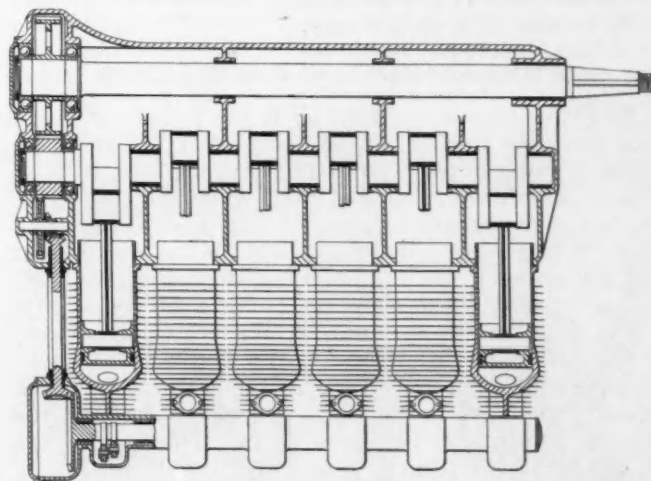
INVERTED GEARED ENGINE WITH GEARS AT THE REAR
